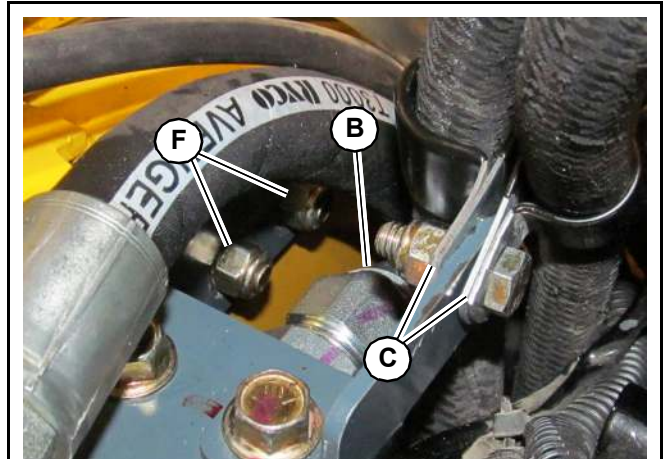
Disconnect Hydraulic Line and Hose Bracket from Hydraulic Filter Manifold
